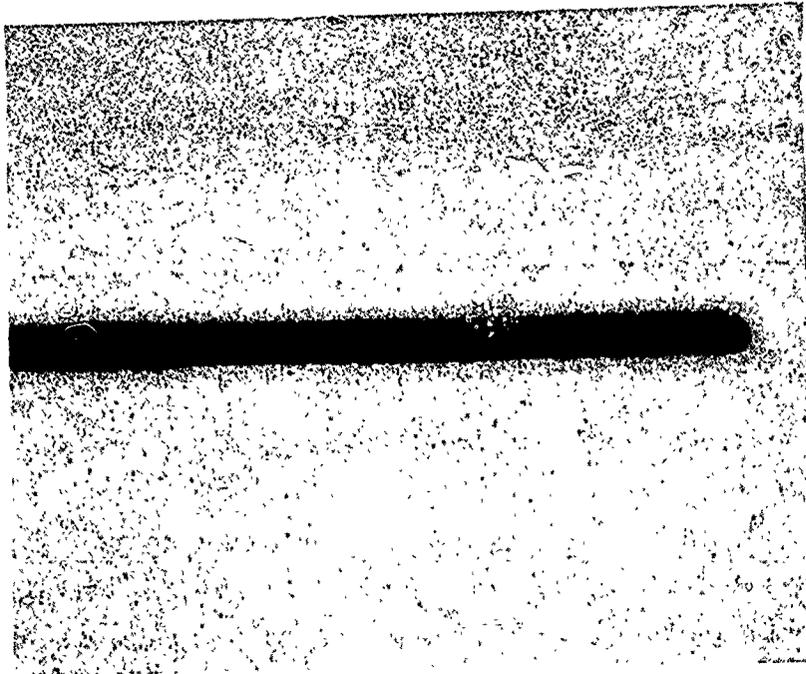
AWGO (dia. 0.032 inch) copper magnet wire ML insulation; air abrasive stripped.
